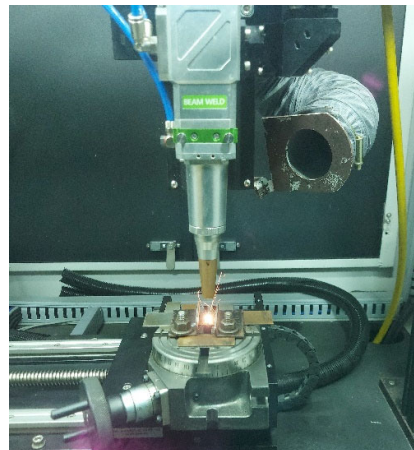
Pictorial view of ongoing laser welding on workpiece
